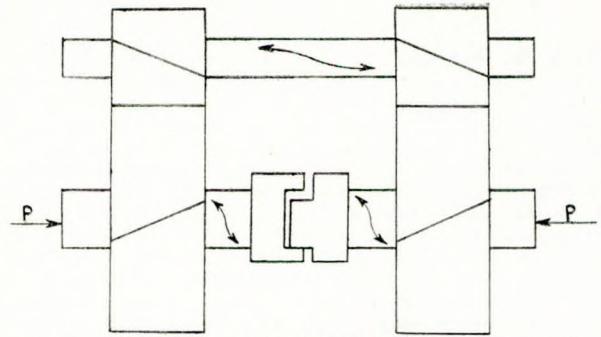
Power circulation in helical gears pre-loaded by axial thrusts applied to wheel shafts
